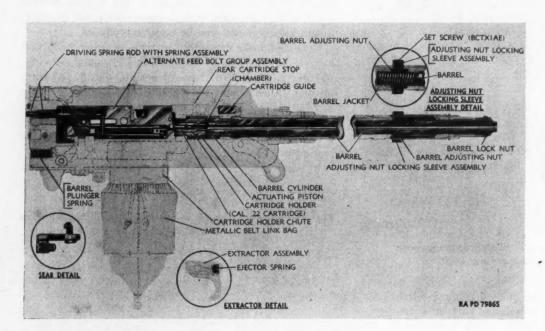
Carbon pencil rendering of machinegun trainer shows relation of parts, with housing in phantom
